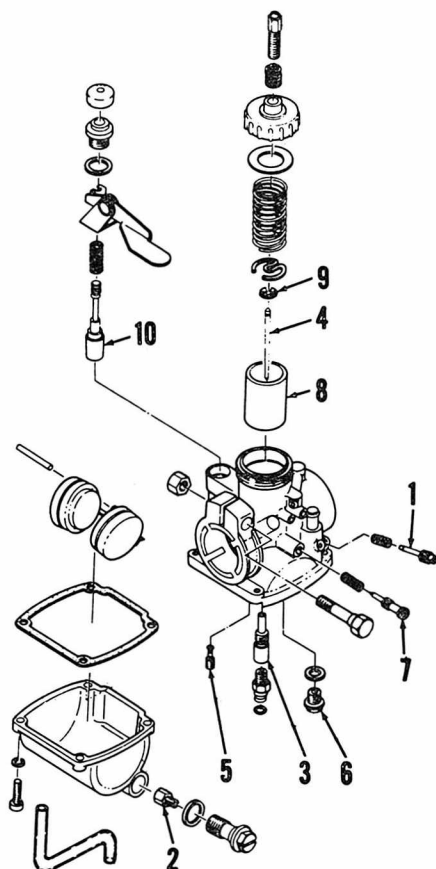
Exploded view of carburetor used on HT-1 models.
